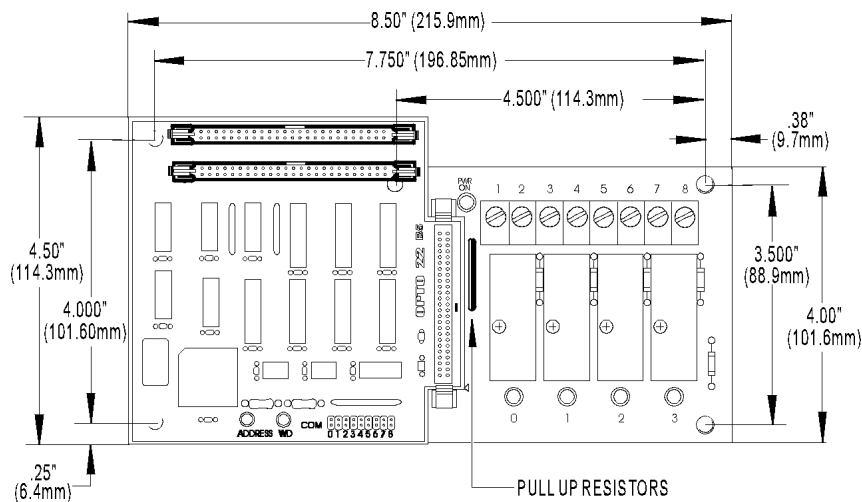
Mounting Dimensions of the PB4H with a B5 Installed
